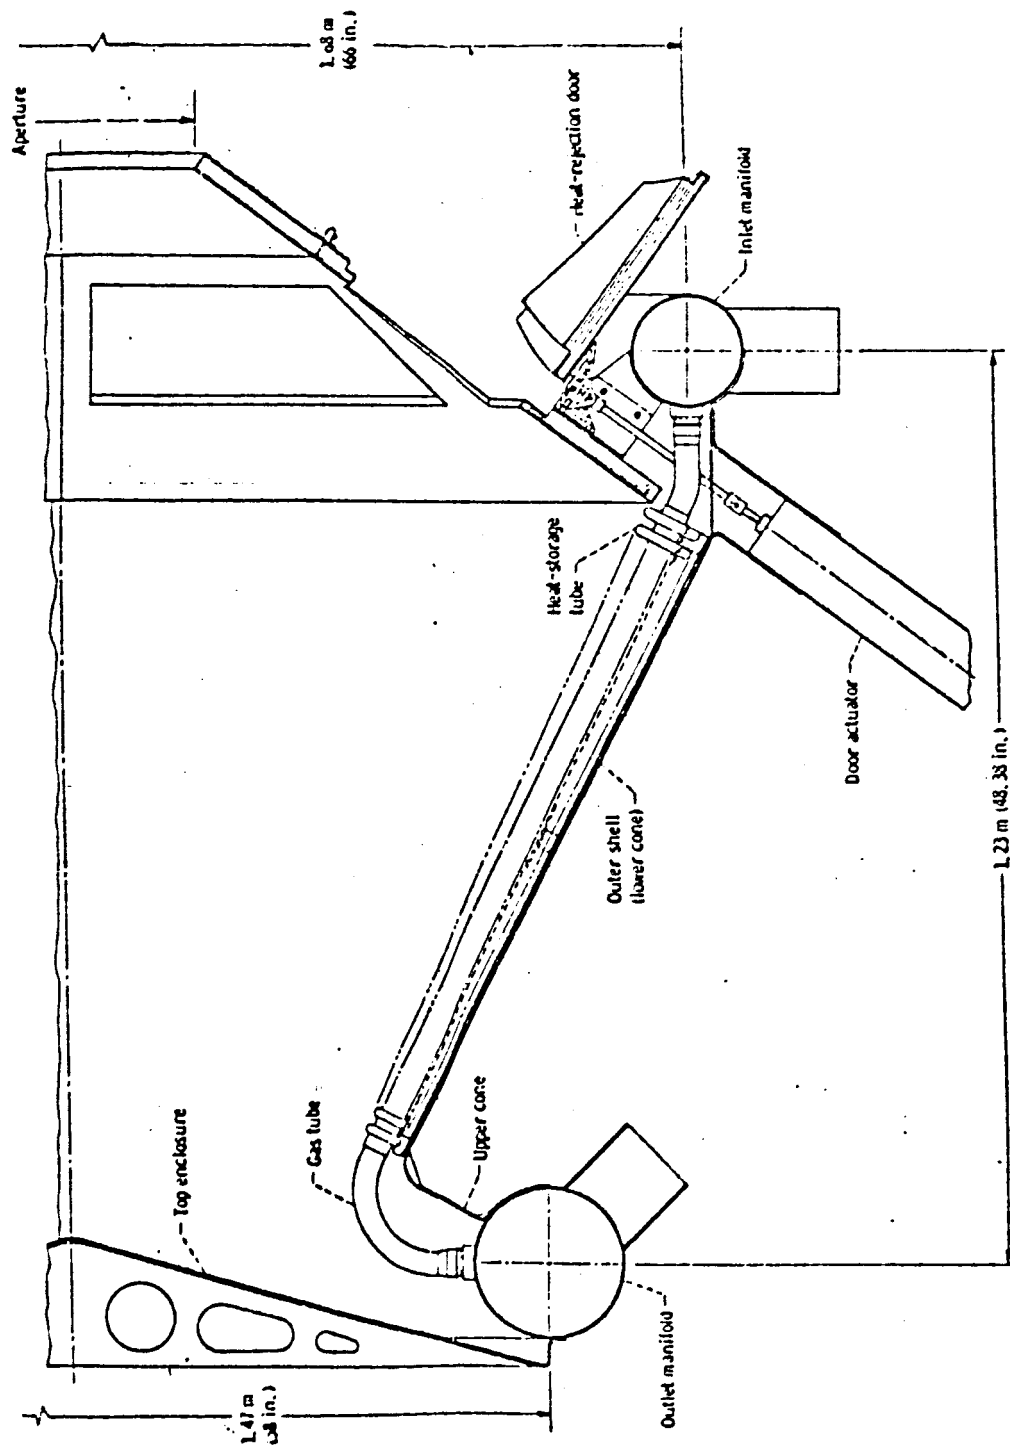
RECEIVER SECTION SHOWING HEAT STORAGE TUBE DETAIL [1]
